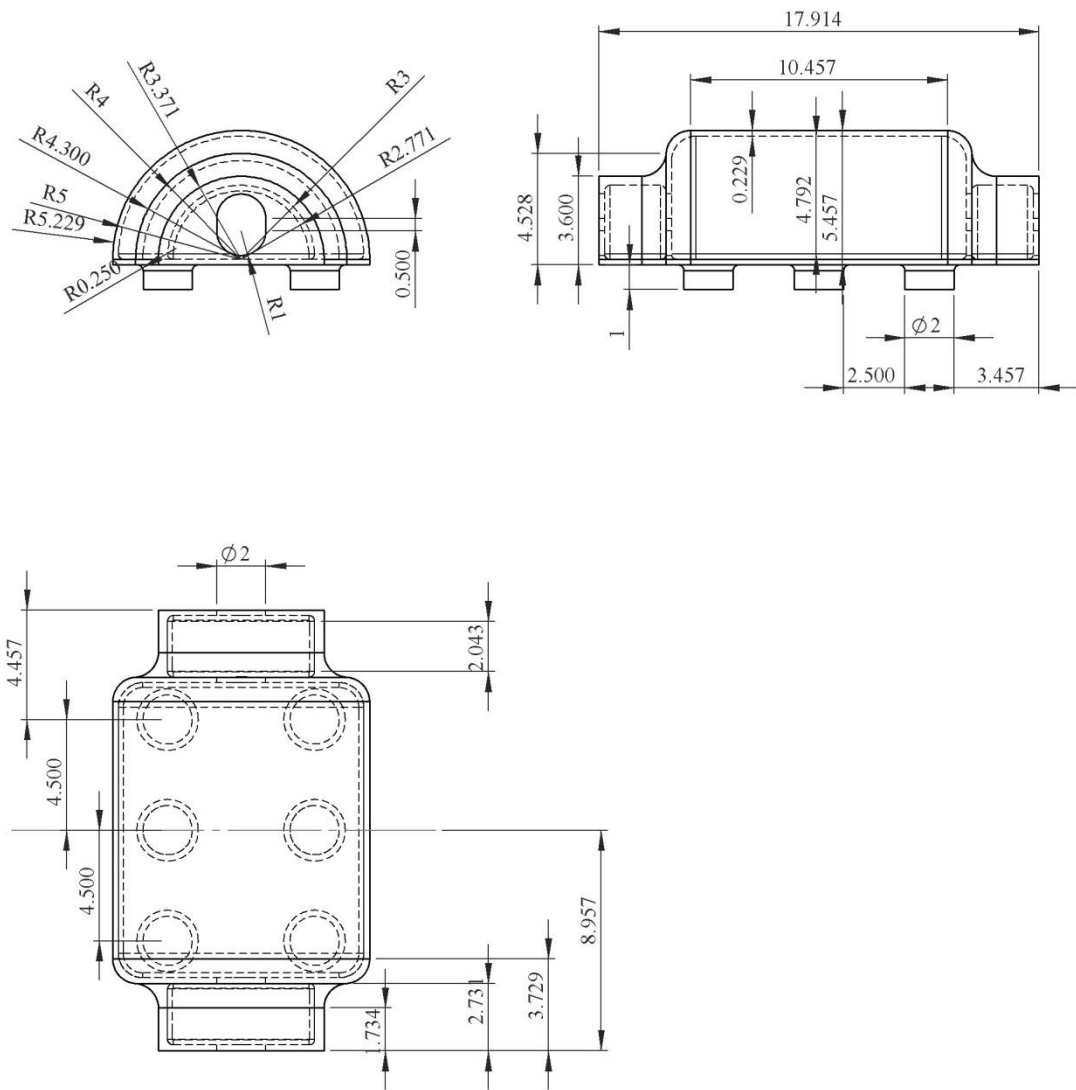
2. Engineering drawing of the magnesium structure. All the dimensions are in meters.
